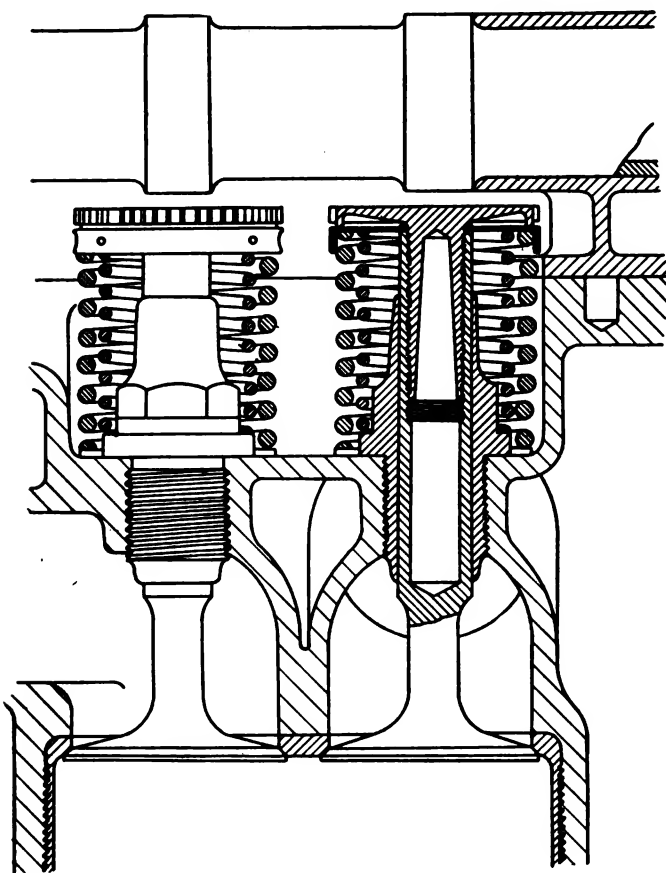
ON THE HISPANO-SUIZA ENGINE A SPECIAL ARRANGEMENT FOR ADJUSTING THE VALVE CLEARANCE BY INSERTING A SCREW IN THE VALVE-STEM IS EMPLOYED
